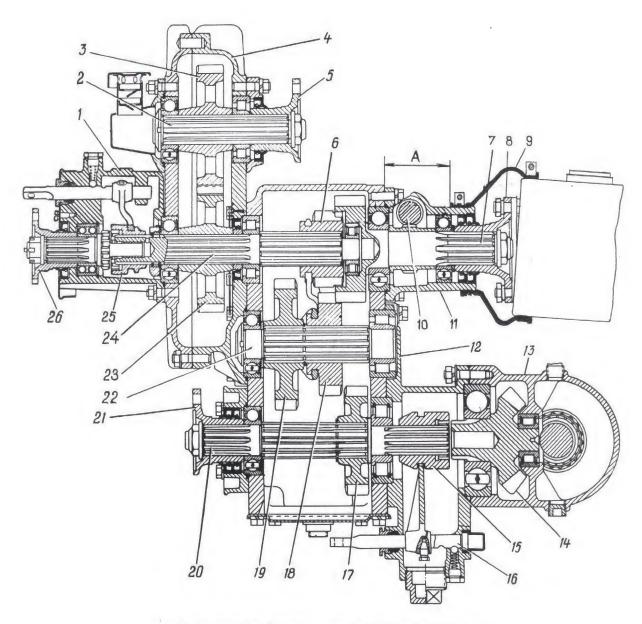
TRANSFER WITH REDUCTION UNIT AND POWER TAKE-OFFS
